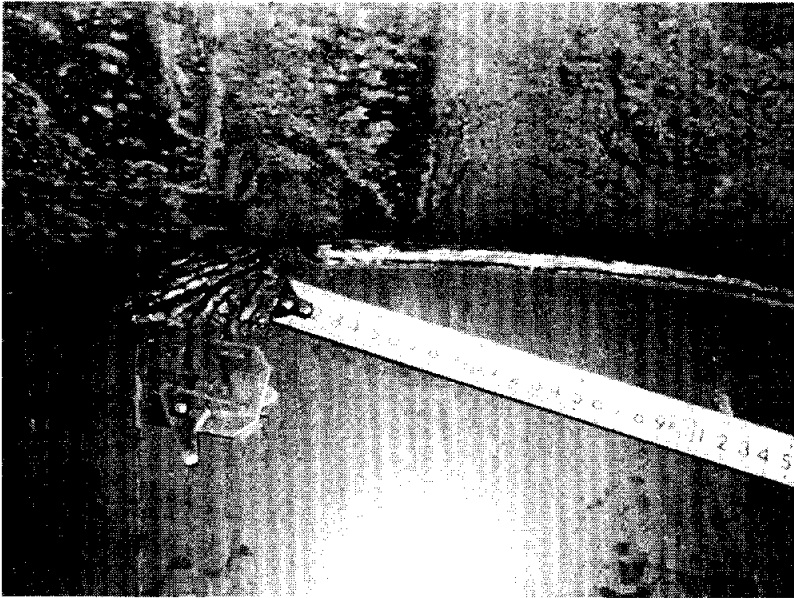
Welding bead at end point of welding line(B)
